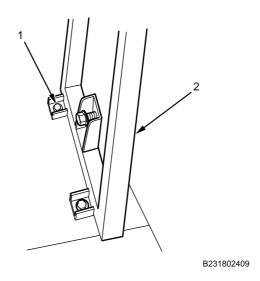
Gunner Platform Stand Floor Mounting Bolts.
